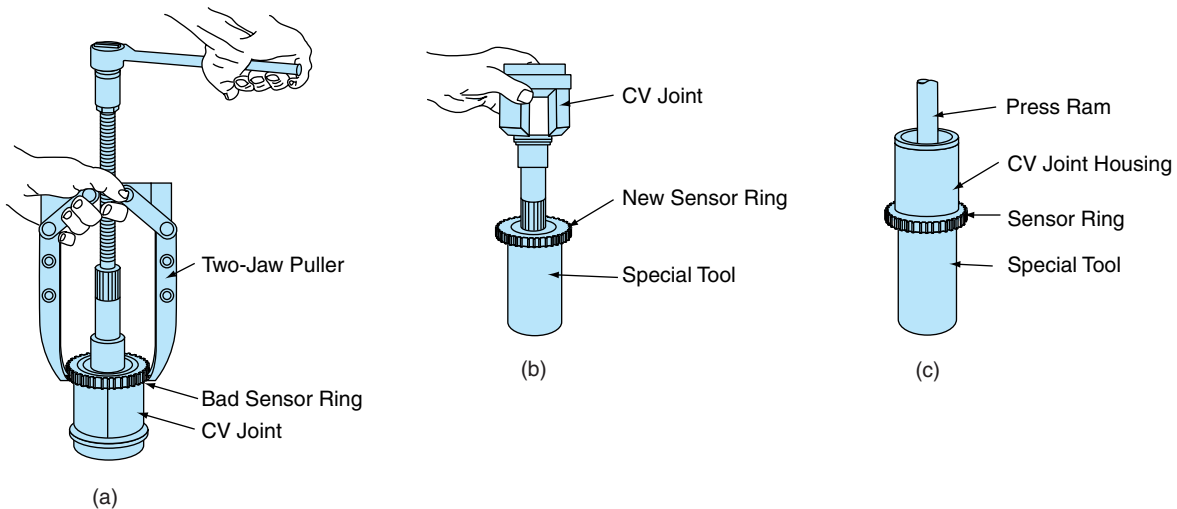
A damaged speed sensor tone ring can be removed using a puller (a) or special tools. The new ring is placed in position (b) and pressed into place (c) using a special tool.
